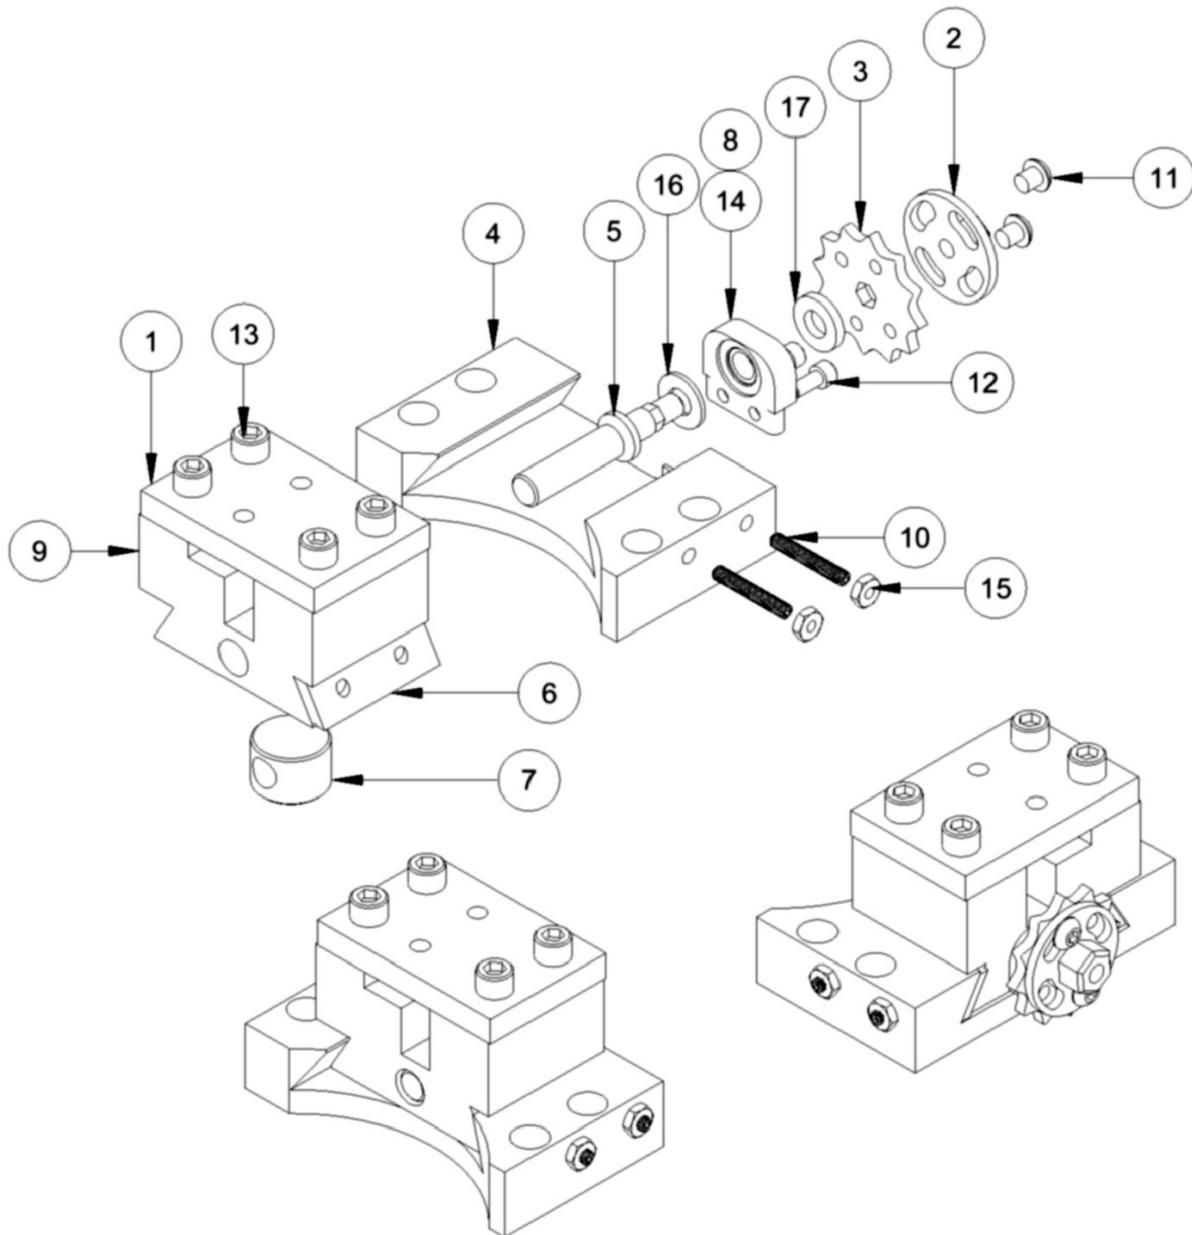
Low Clearance Tool Slide Assembly TS01-1003
